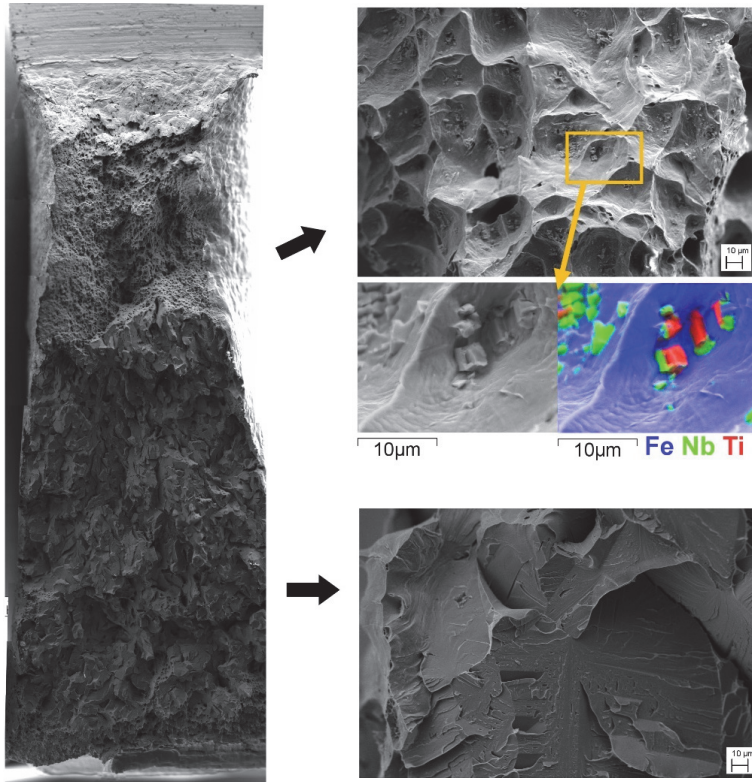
Example of fracture surface: ductile fracture (top) and brittle fracture (bottom). The specimen had impact energy of 127 J/cm² and 30% of ductile fracture. [Paper IV, reprinted by permission of ASMET]
